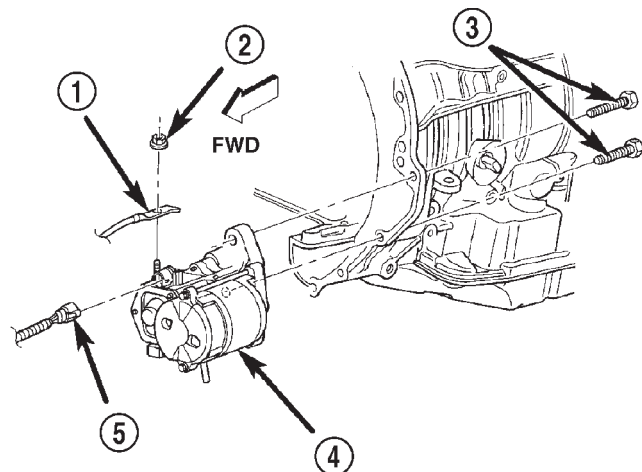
Starter Motor Remove/Install - 4.7L Engine with Automatic Transmission
